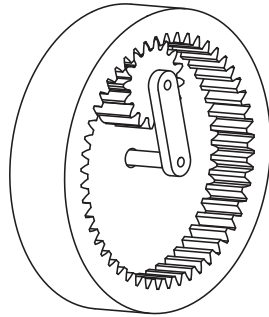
Example of planetary gear unit (PGU) with internally meshing gears.
